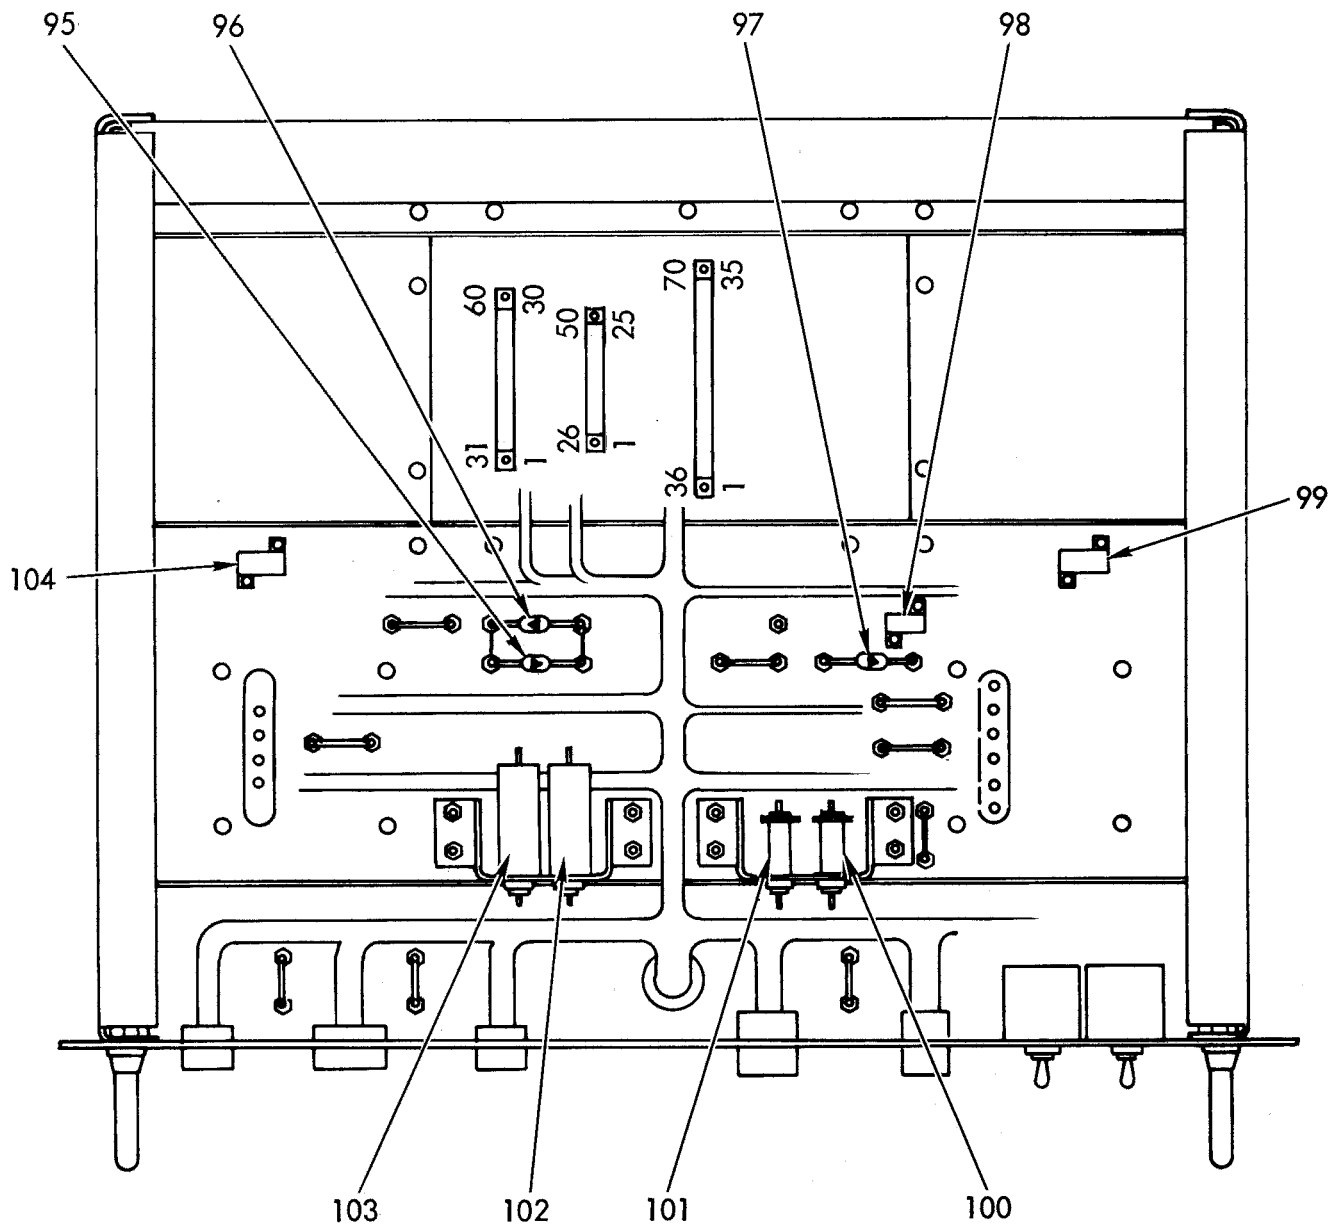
Panel/Chassis Assembly - Wired (Sheet 4 of 6)
